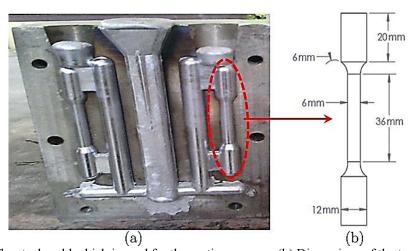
(a) The steel mold which is used for the casting process, (b) Dimensions of the tensile sample.
